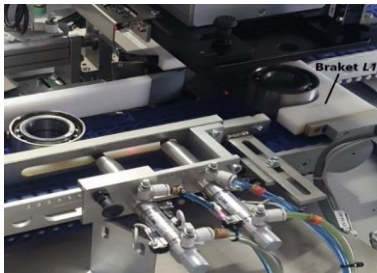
The L-shaped bracket L_1 is mounted on the piston of cylinder 4
